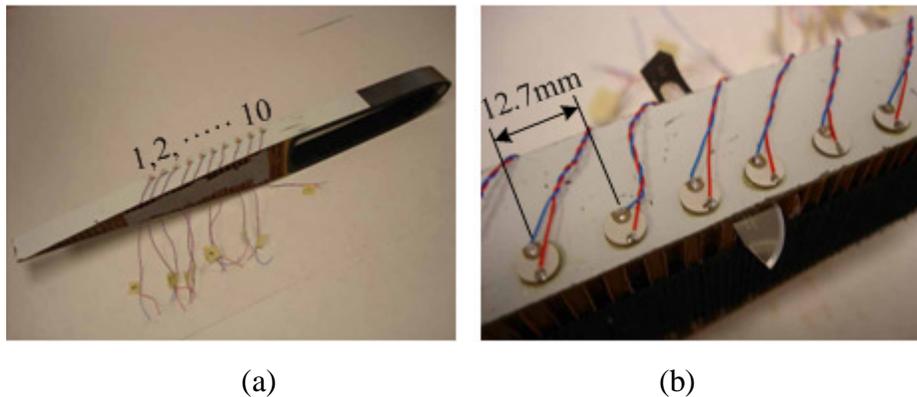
A helicopter rotor blade section mounted with PZT wafers (a). Produce debonding with a knife (b)
